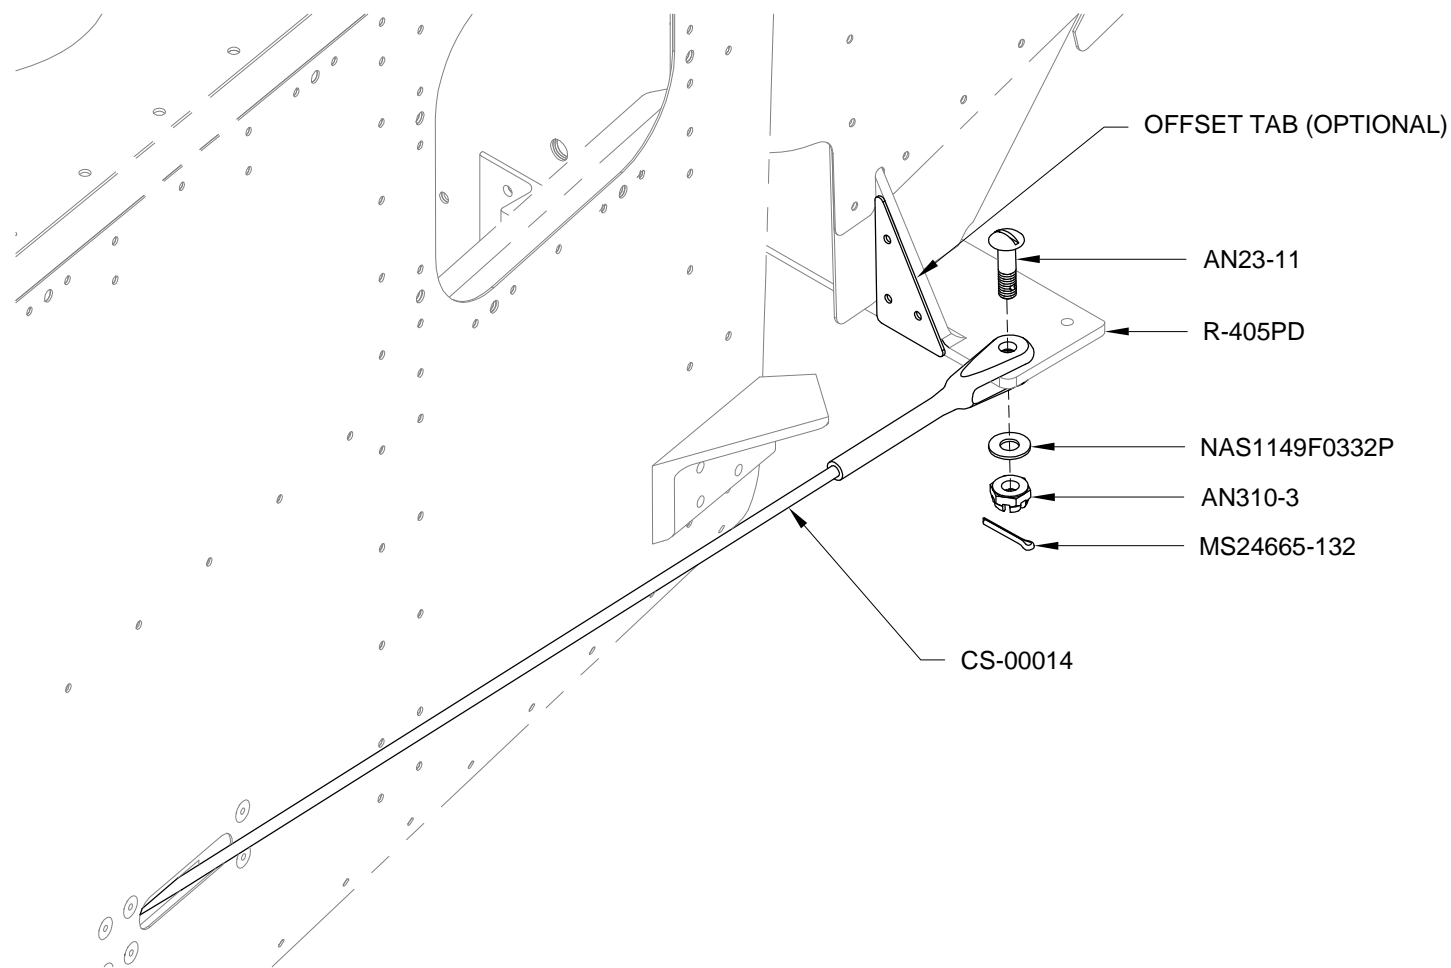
RUDDER CABLE ATTACHMENT & OFFSET TAB INSTALLATION
